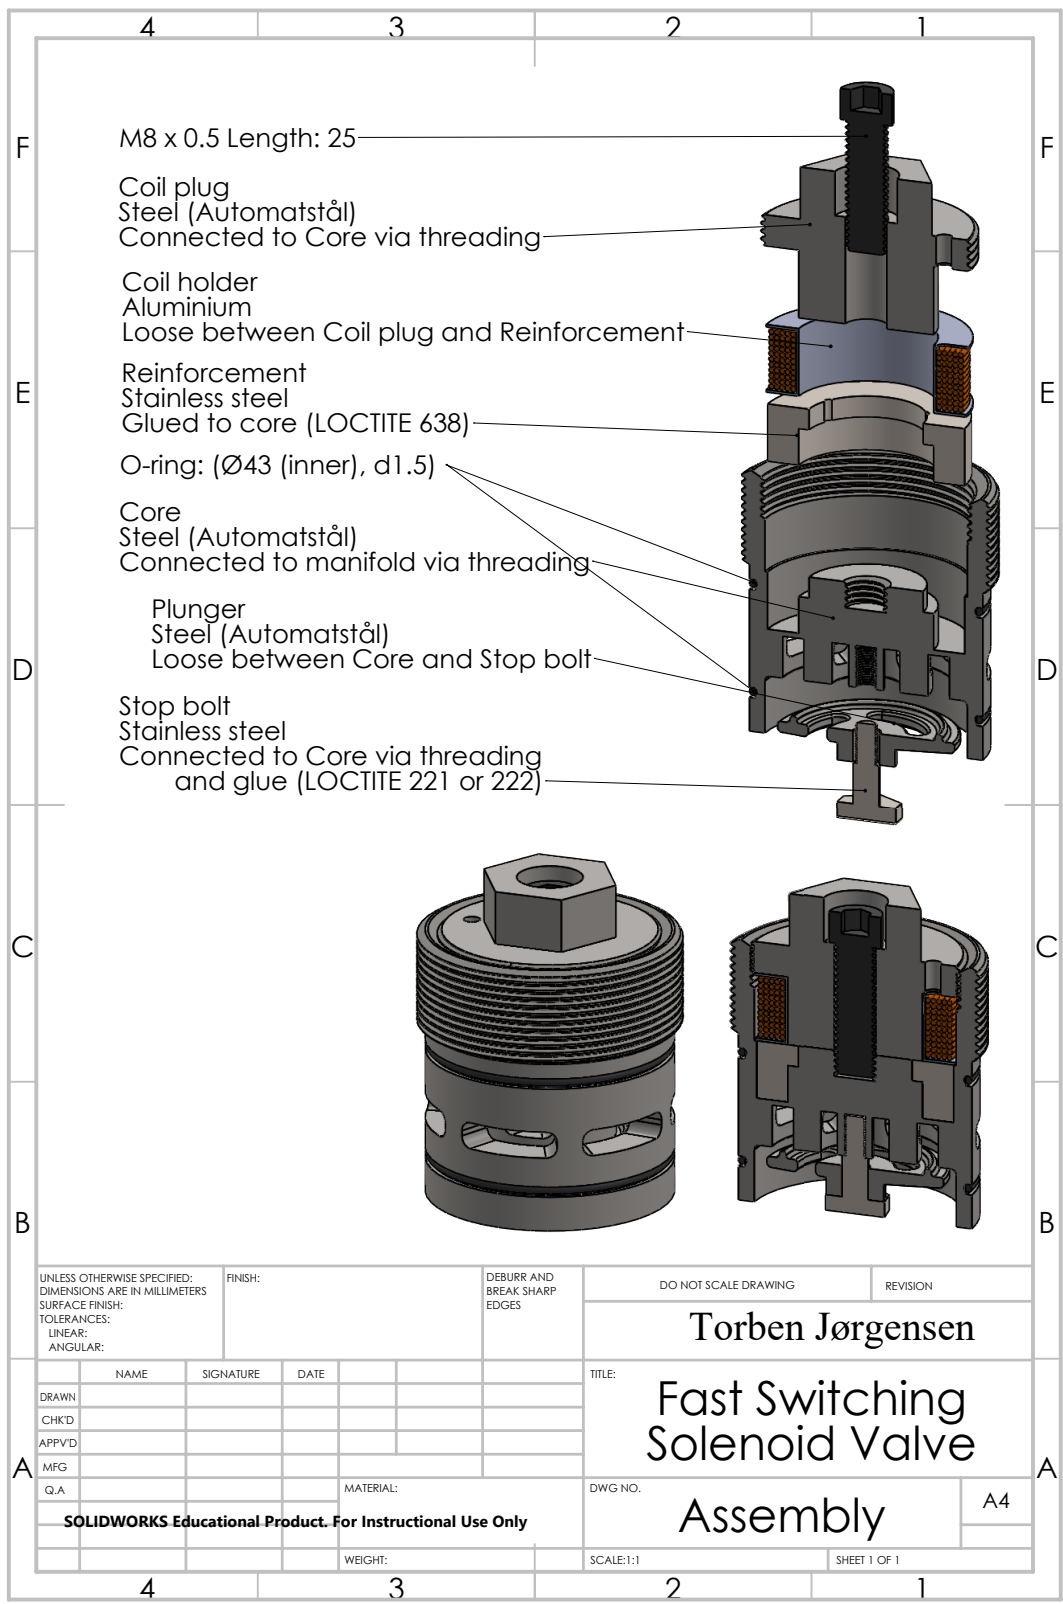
Solidworks drawing of the prototype assembly with each part annotated.
